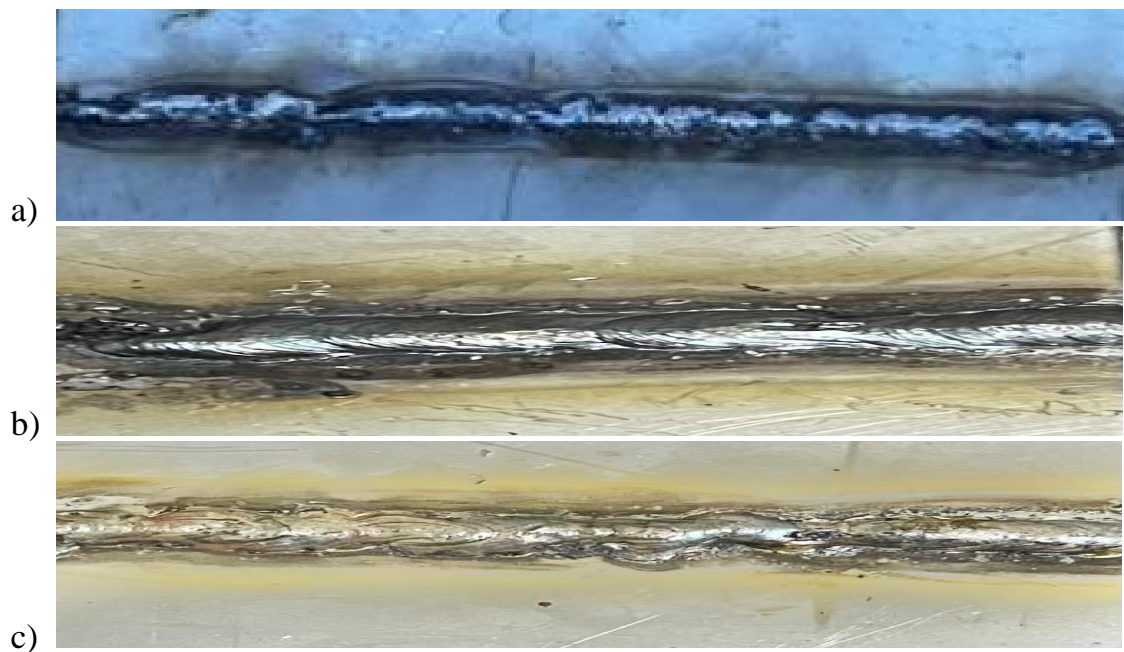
Welding experiment. (a) 40 s; (b) 60 s; (c) 80 s.
